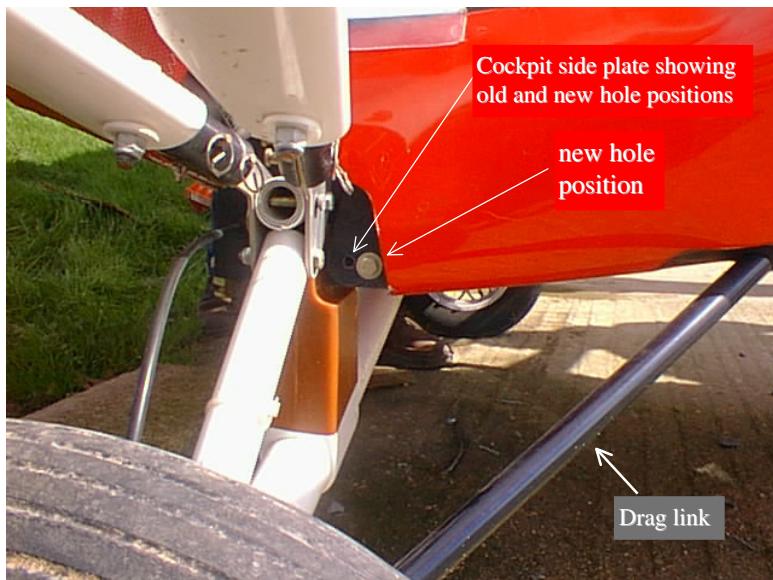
Photograph of AX2000 undercarriage side showing right hand drag link and cockpit side plate.
